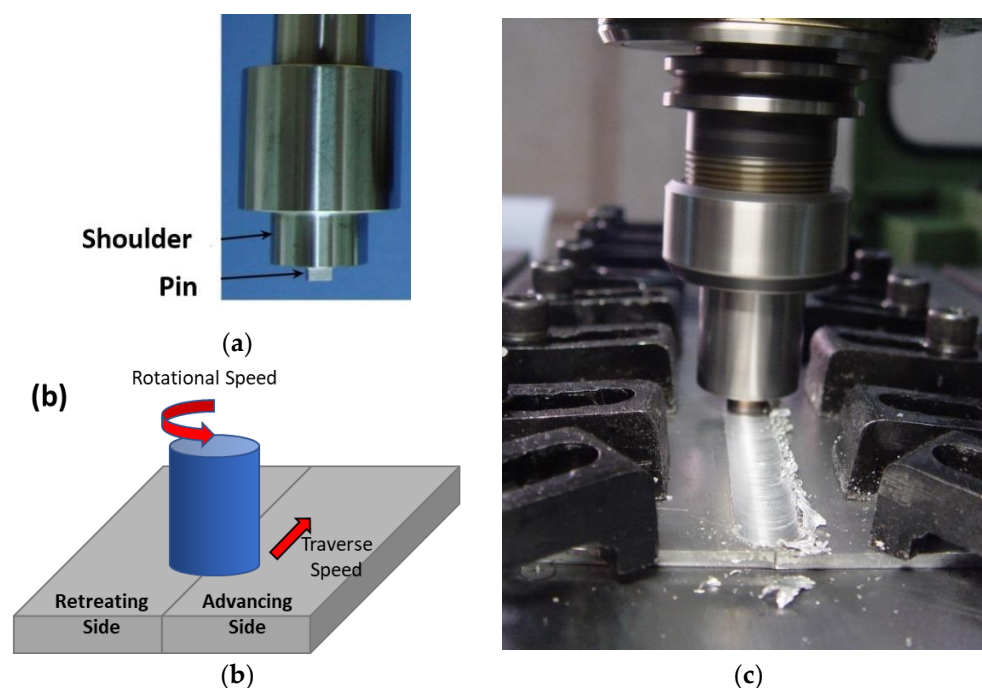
(a) a simple FSW tool, (b) schematic of the FSW process, and (c) setup of FSW showing the designed fixture.
